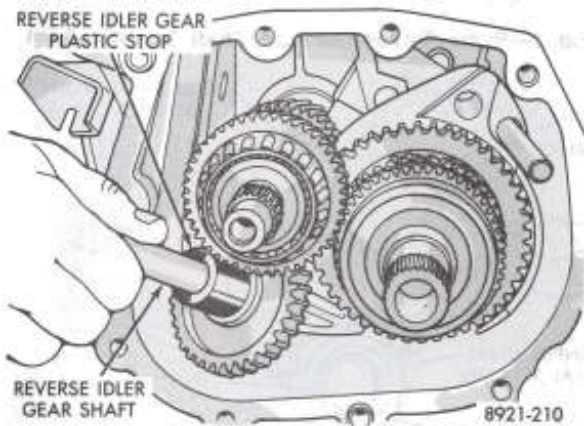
Remove or Install Reverse Idler Gear Shaft and Gear
